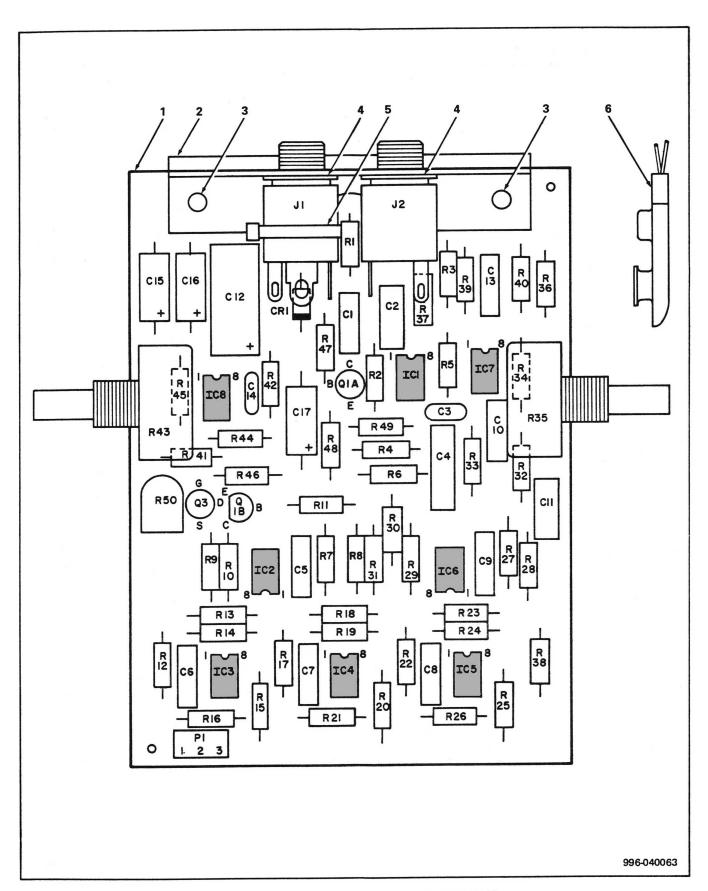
PRINTED CIRCUIT BOARD ASSEMBLY
